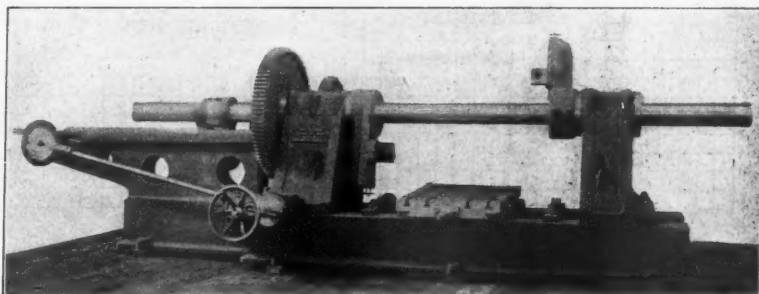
The Newton Locomotive Cylinder Boring Machine.
